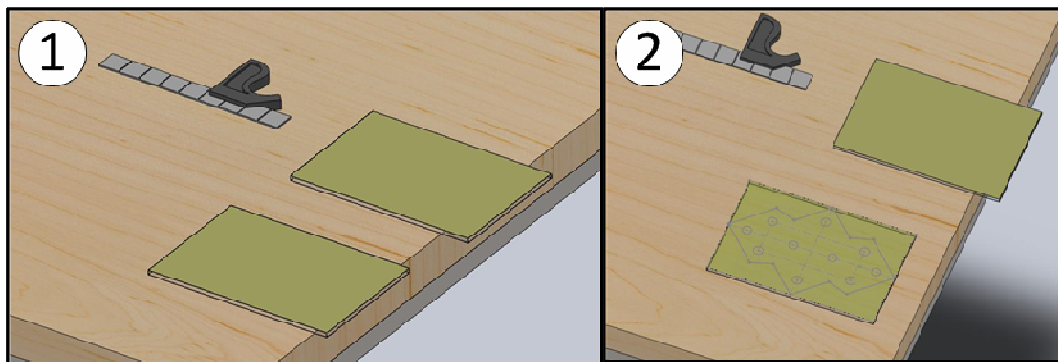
laying out Side 1-(1) Cover both work pieces with strips of Packing Tape. (2) Draw out the edges found in Drawings 1 and 2 on the work piece.
